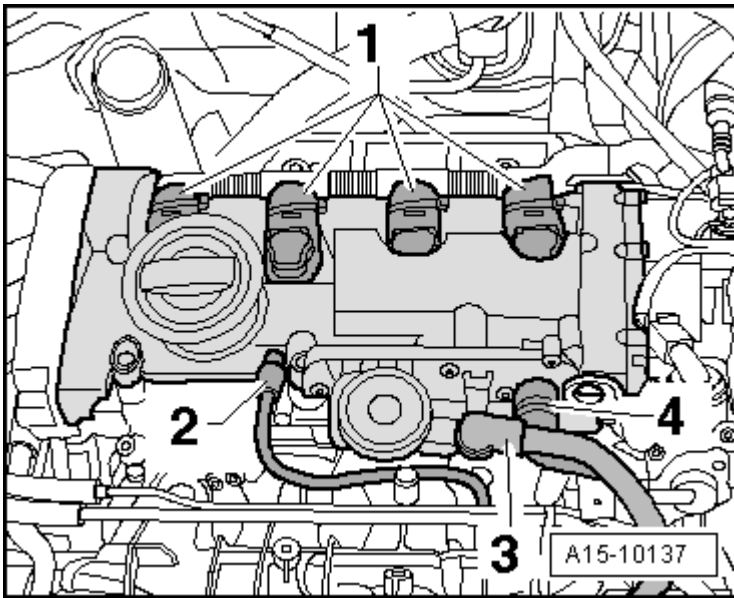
Identifying Crankcase Ventilation Line Between High Pressure Pump And Cylinder Crankcase
